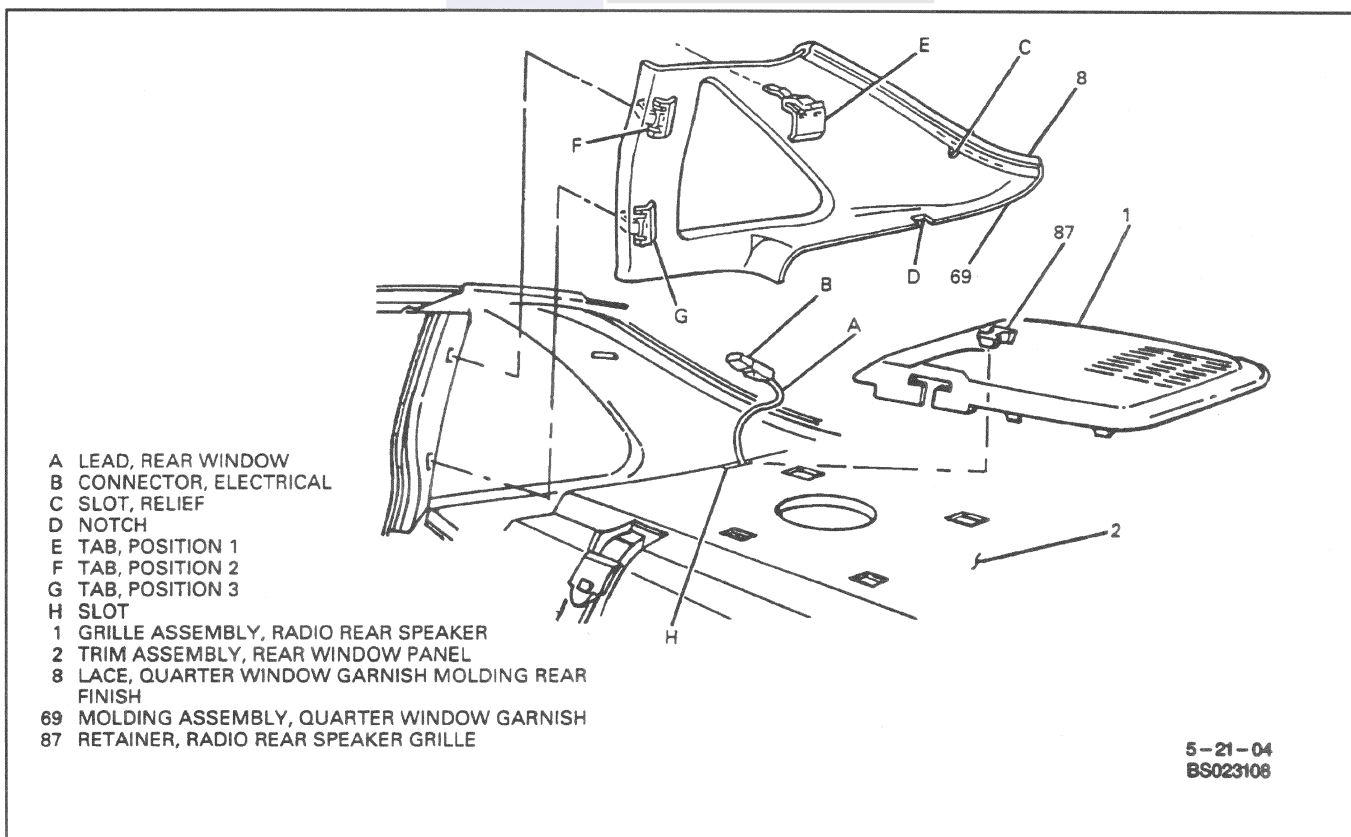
Removing Quarter Window Garnish Molding and Speaker Grille-(Chevrolet)
